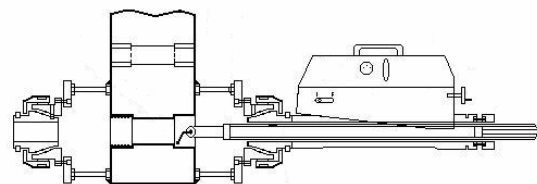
MIG/MAG (GMAW) build-up welding equipment [6]
